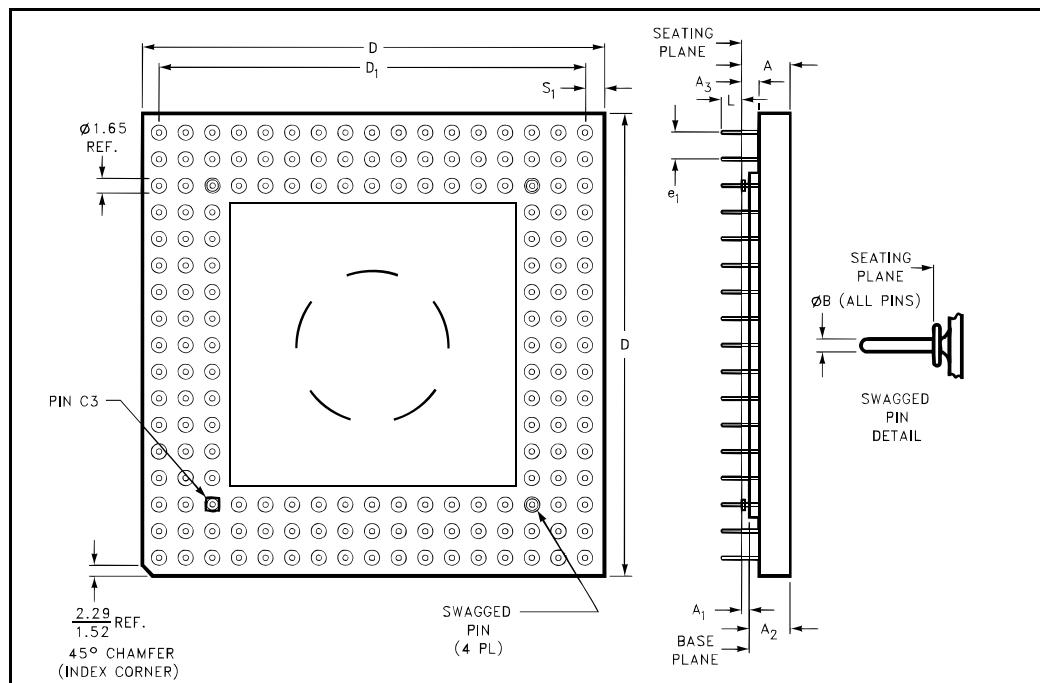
Principal Dimensions and Data for 168-Pin Pin Grid Array Package
